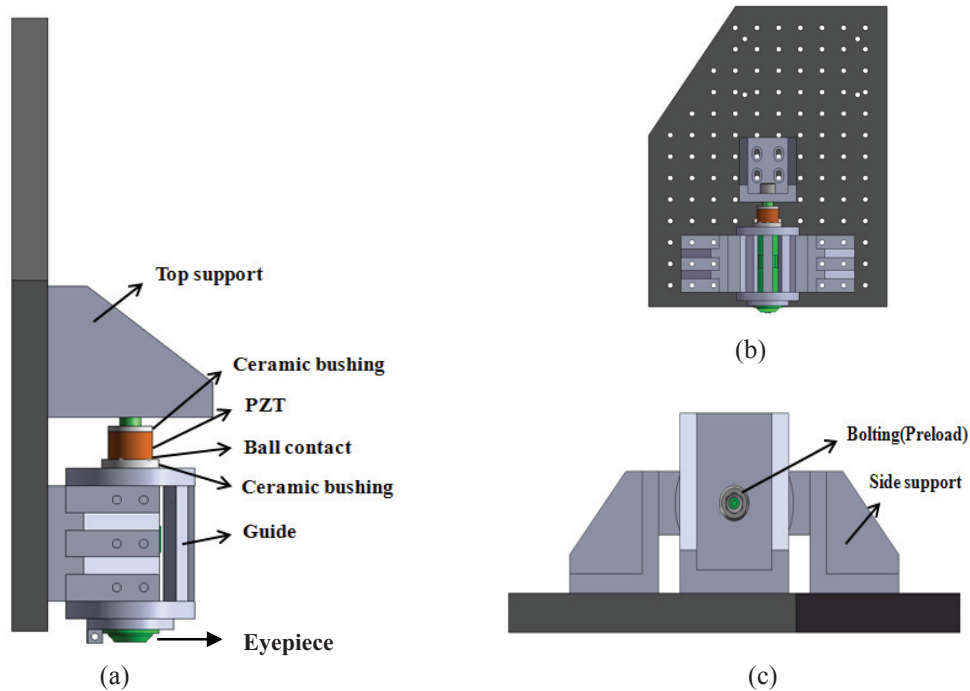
Assembly mechanism (a) Side View (b) Front View (c) Magnified top view
